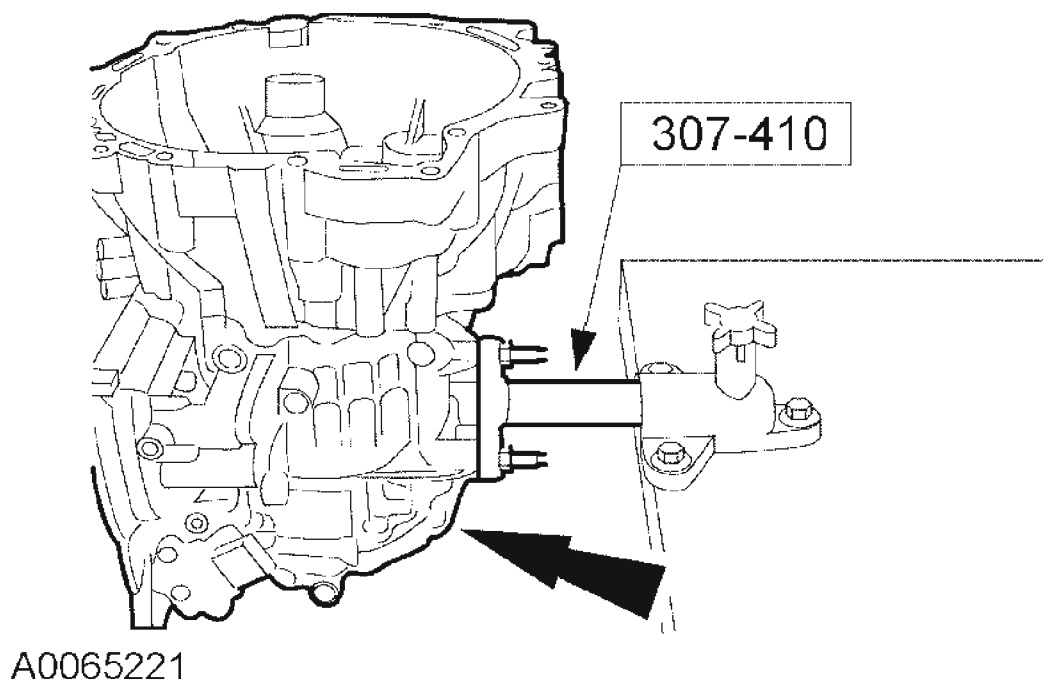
Mounting Transaxle To Bench Using Special Tool
